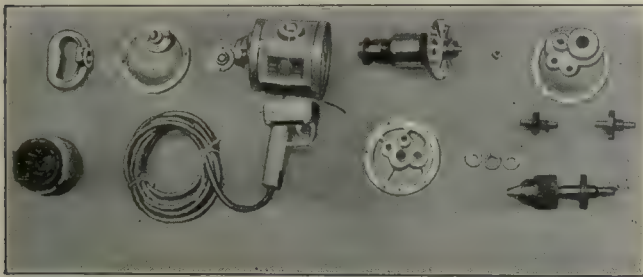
PARTS OF THE BLACK & DECKER DRILL
